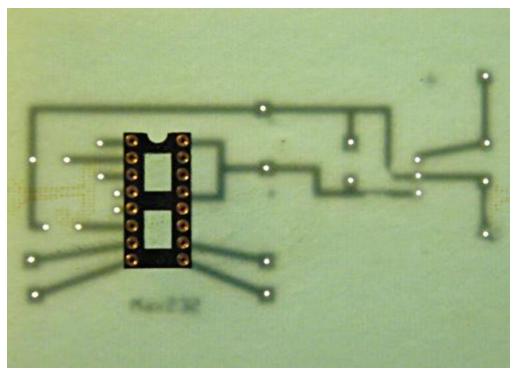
Image of the finished board viewed with transmitted light. The foil pattern is on the bottom side.
